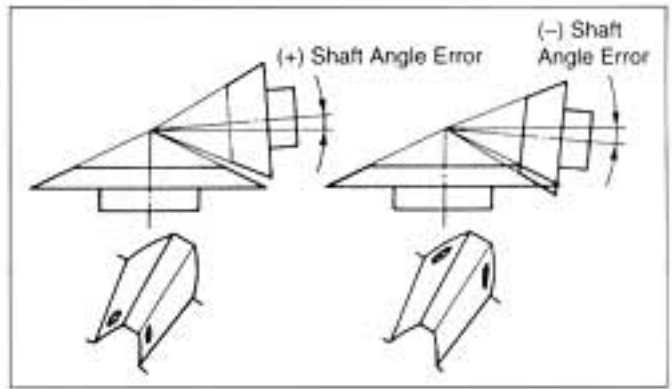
Poor Contact Due to Shaft Angle Error
